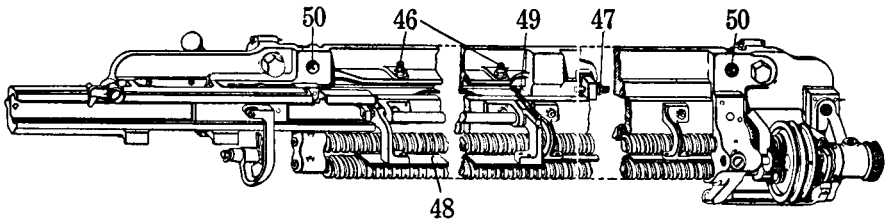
Front view of single distributor. The distributor beam vertical adjusting screws are shown at 46, the horizontal adjusting screw at 47, the distributor screw guard at 48, the distributor screw guard spring at 49, and the tap-holes for distributor bracket bolts at 50.
